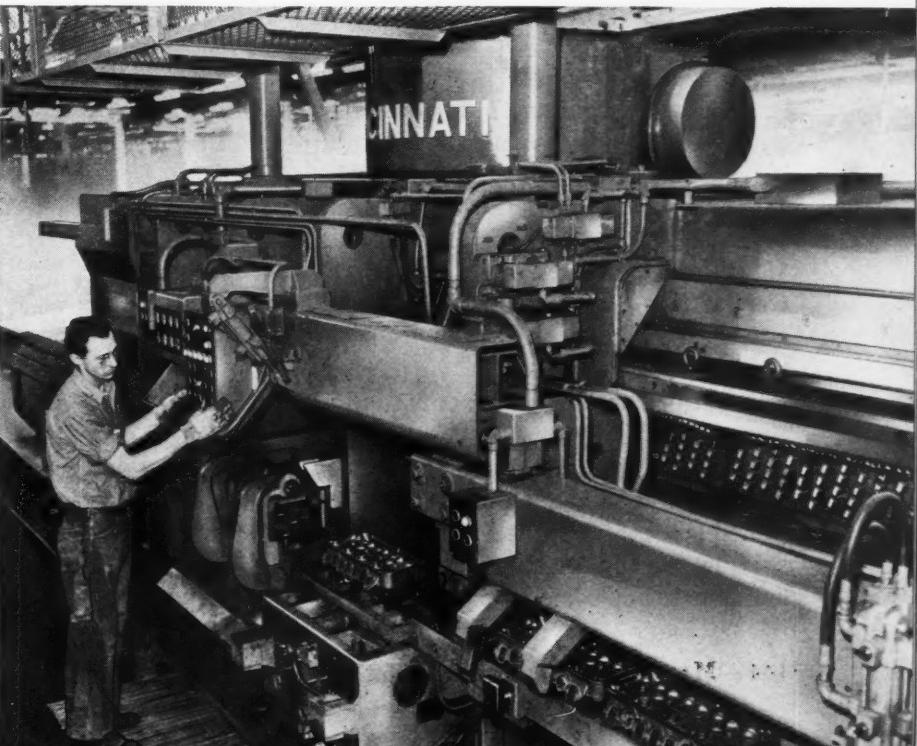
Top, bottom, intake face, and exhaust face of the cylinder heads are both rough- and finish-machined on this two-way horizontal broaching machine
